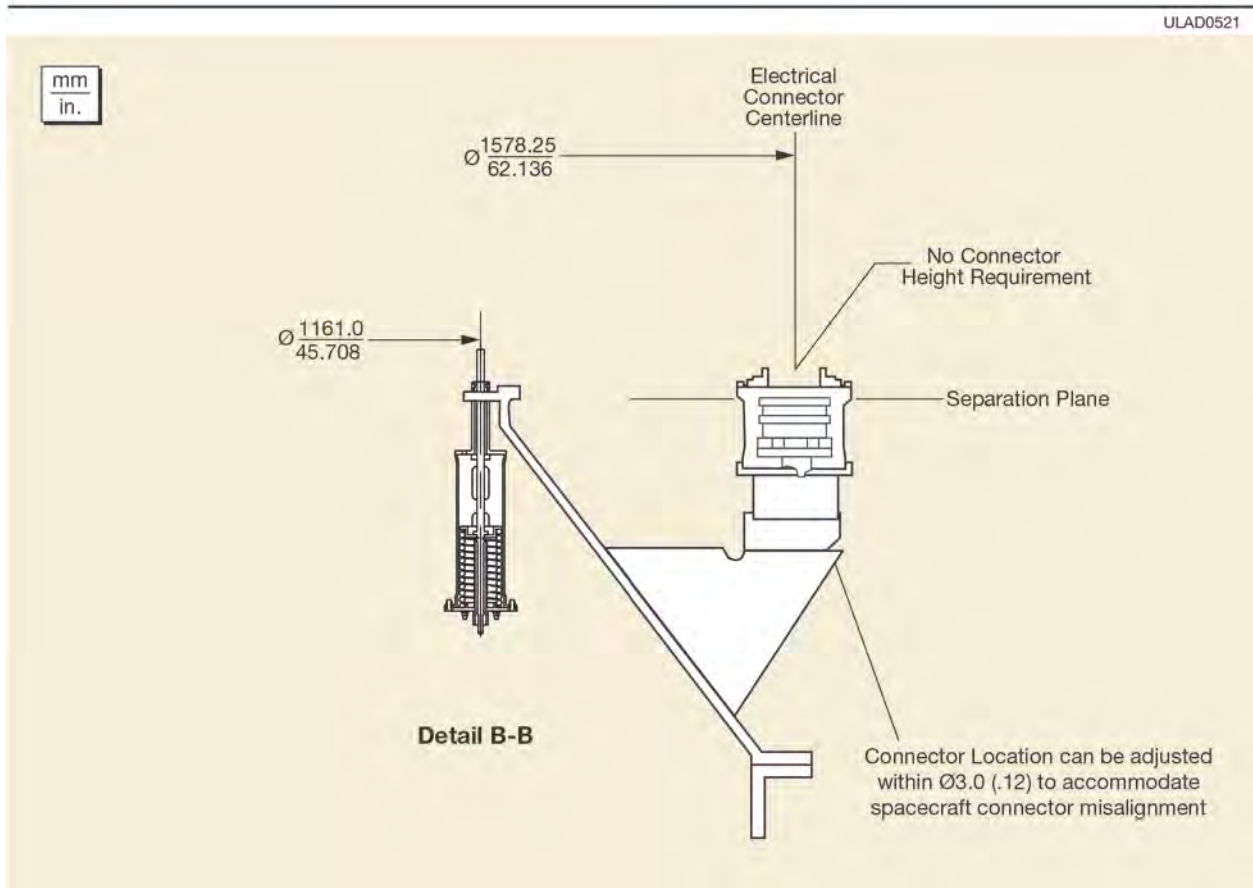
B1194 PLA Separation Spring Assembly and Electrical Connector Bracket
